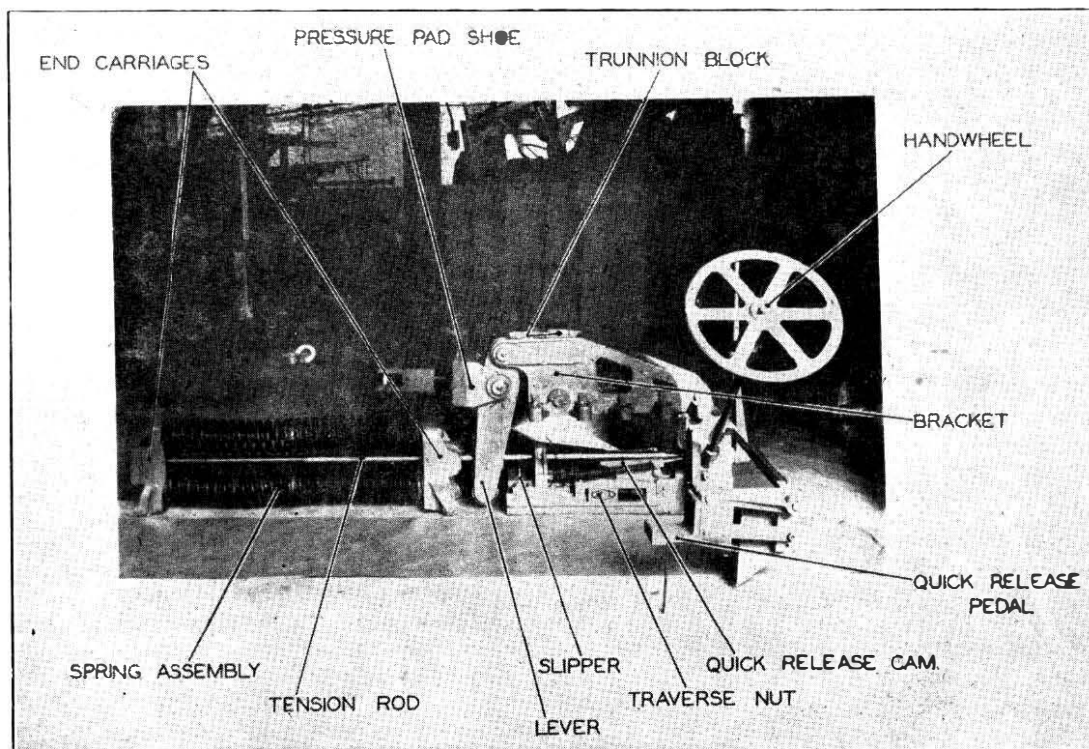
SPRING LOADING AND UNLOADING MECHANISM.
